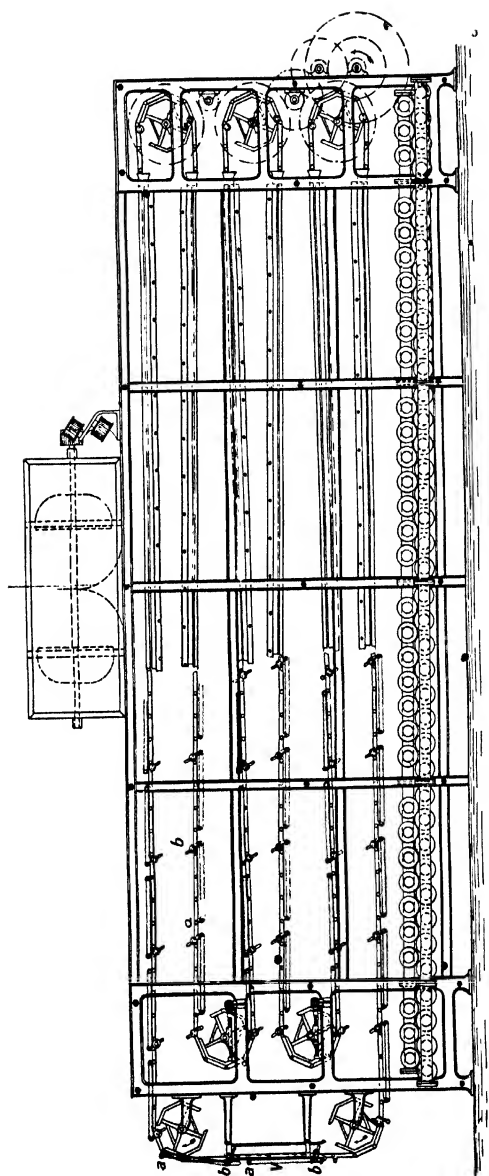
Montforts' Continuous Hank Drying Machine.
